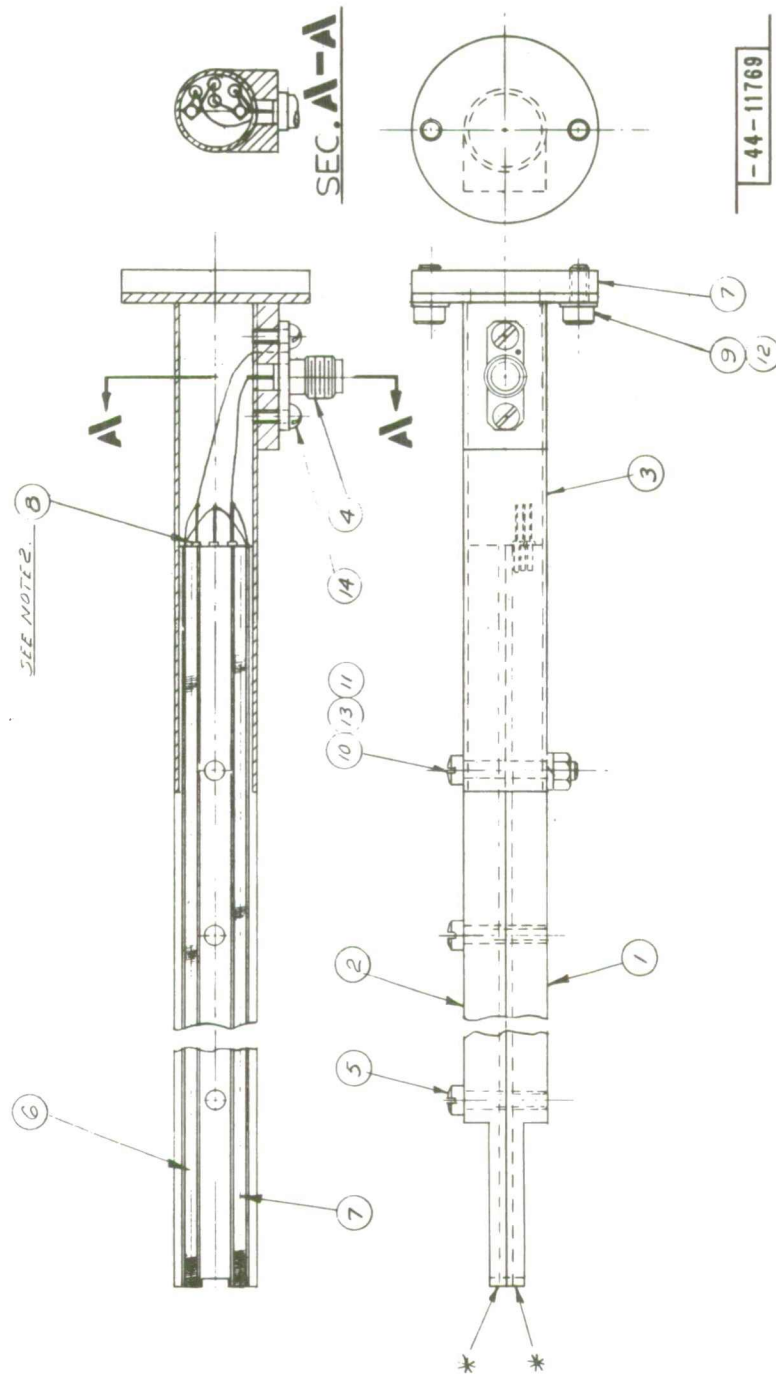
Assembly drawing of magnetic potentiometer probe.
